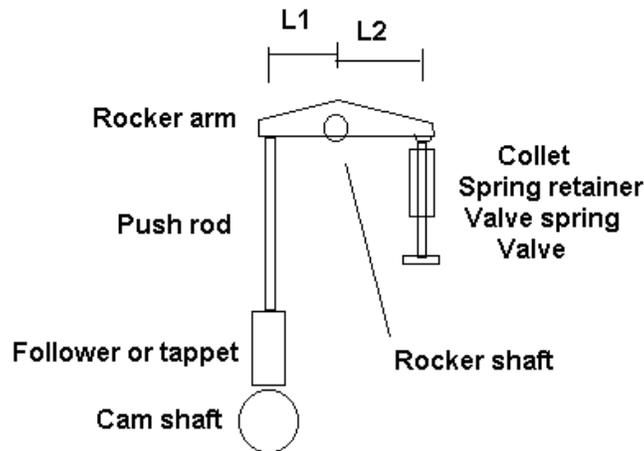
Arrangement of valve train in engine with the cam in the side of cylinder block
